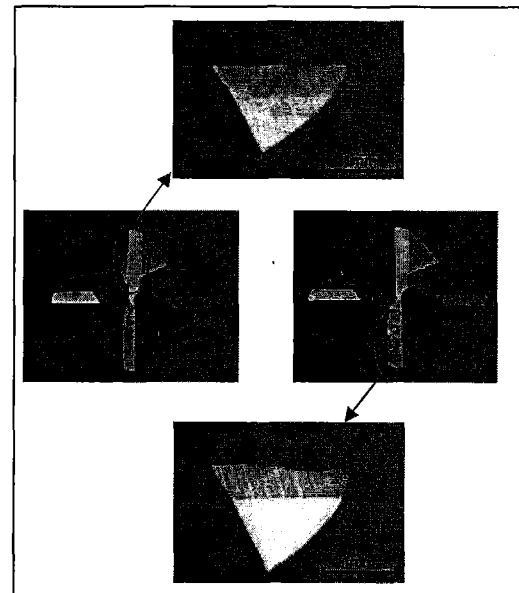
End mill cutting edge: (a) Design 1 and (b) Design 2
